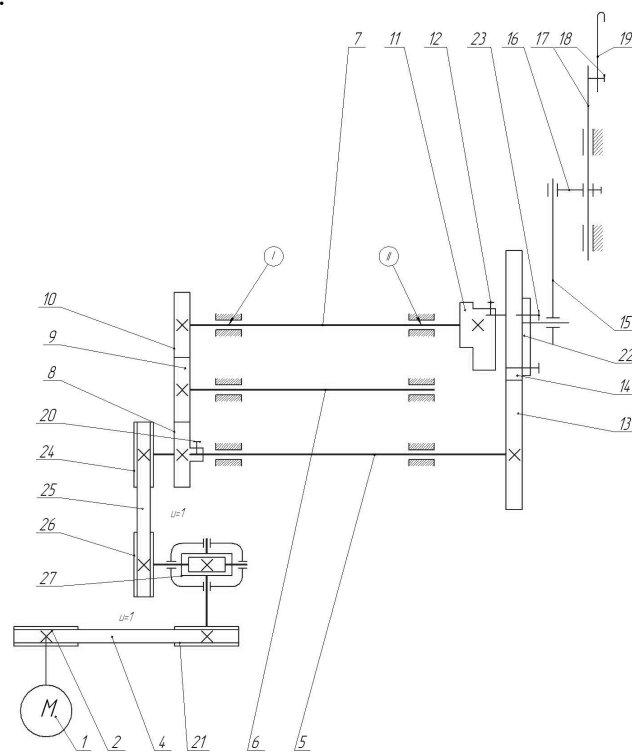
Kinematic scheme of the gear-lever drive mechanism of the working bodies of warp-knitting machines
